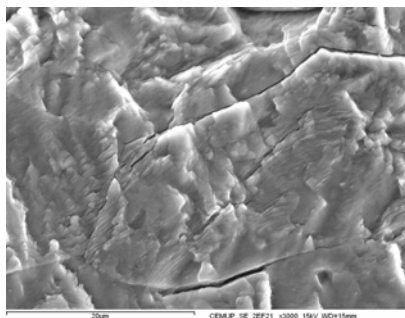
Fatigue striations for two crack lengths, AA6061-T6 MIG welded specimen.
